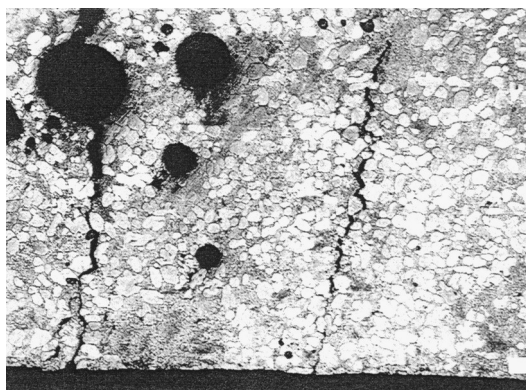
Surface Cracking in a Zinc Casting [2].
